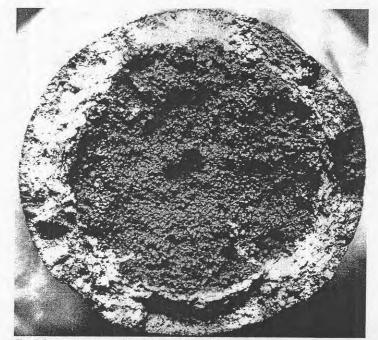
Fracture surface of 1/2" diameter RA-330 bar frame basket.
